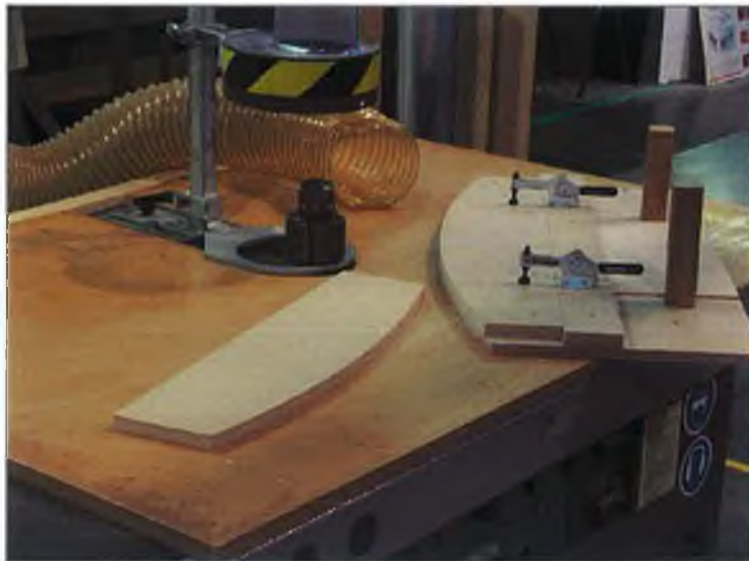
JIG TO PRODUCE CONVEX SHELF ON THE SPINDLE MOULDER
